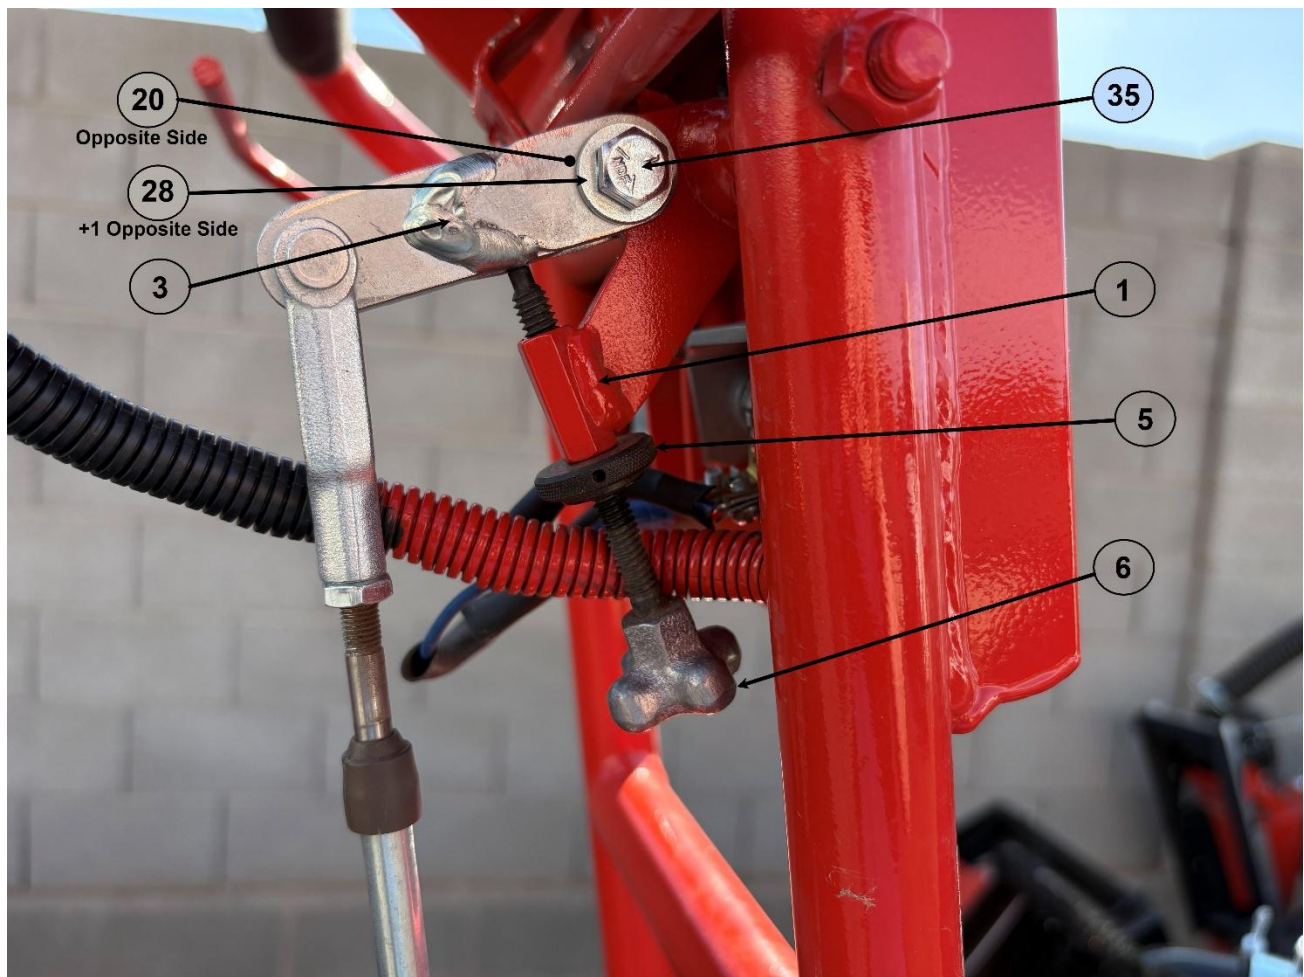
Thumb Screw and Cable Pivot Assembly
